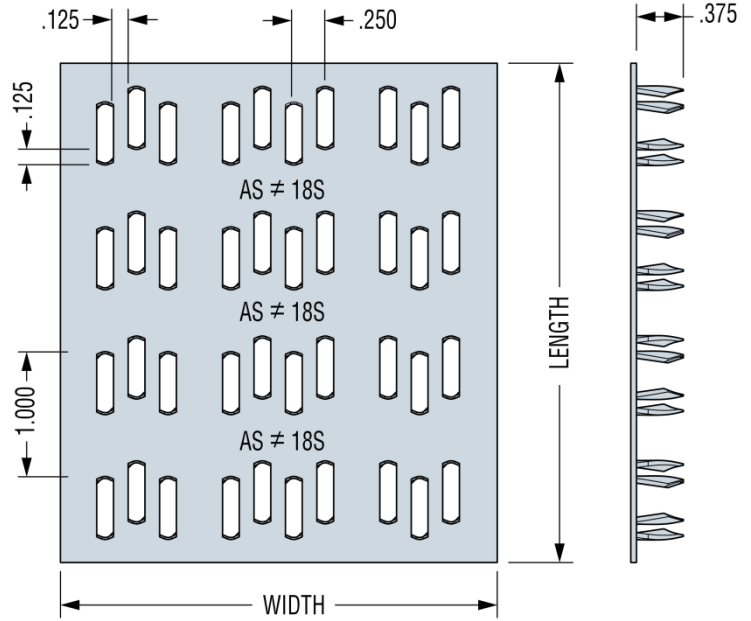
AS 18S6 CONNECTOR PLATE (DIMENSION IN INCHES)
